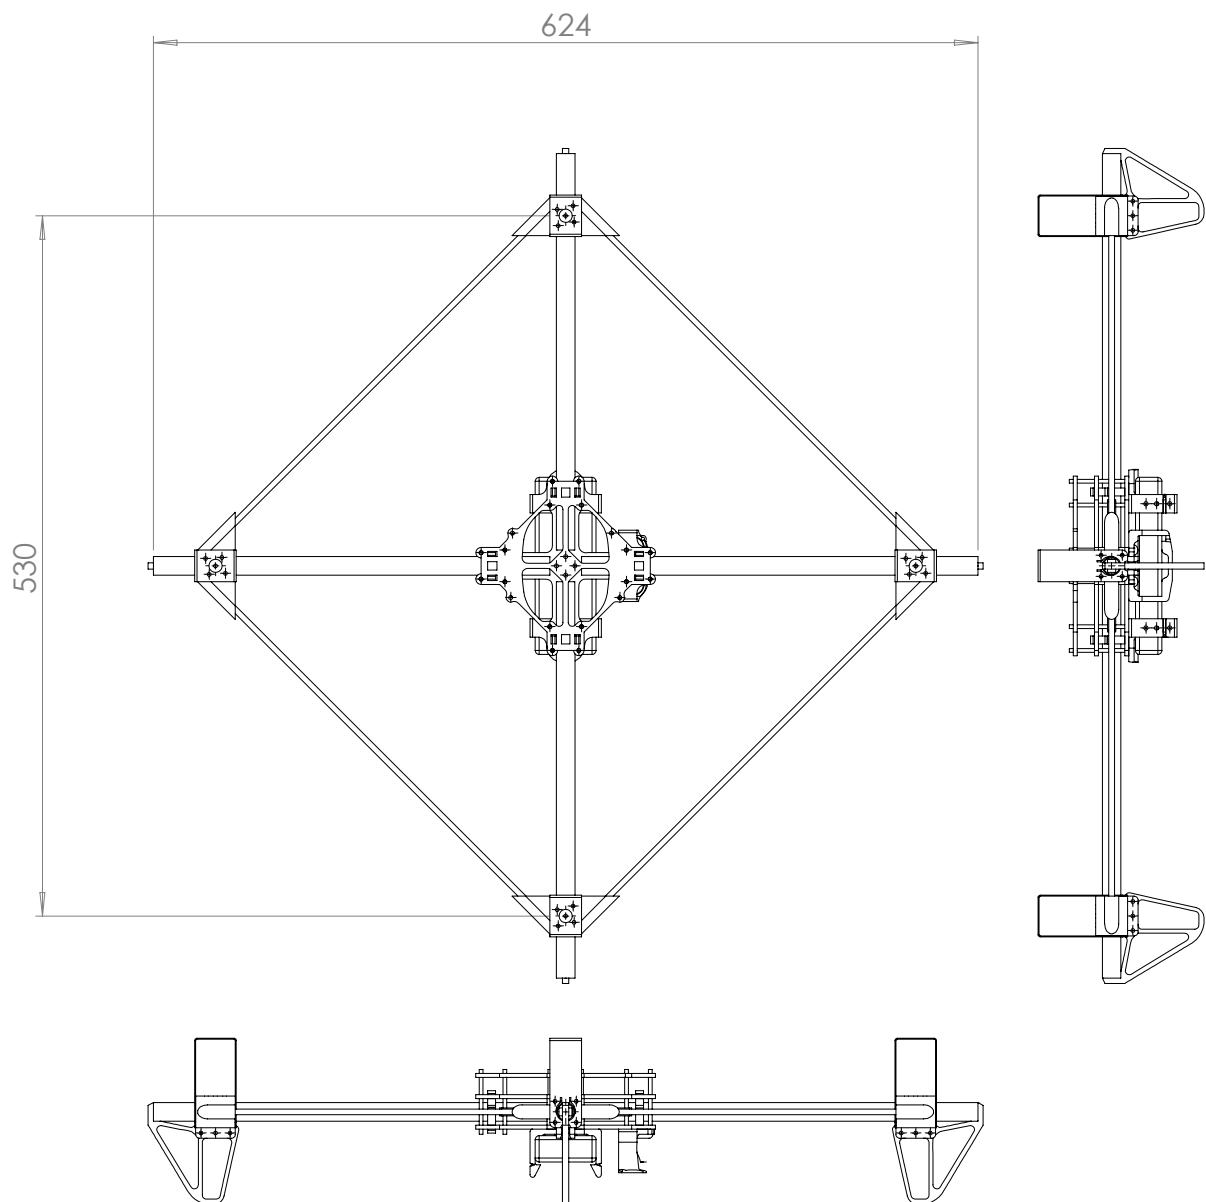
Schematic of Quaffle chassis not including motors, rotors, and electrical components. Units are in millimetres.
